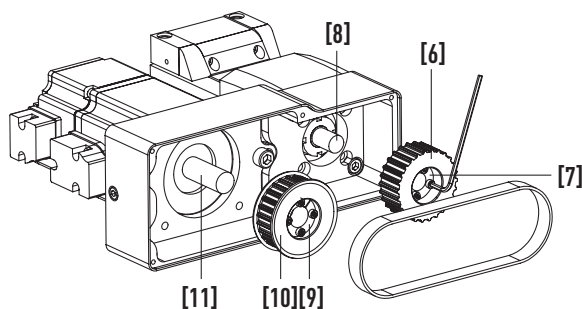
Mounting the motor flange, clamping bolt, and motor
